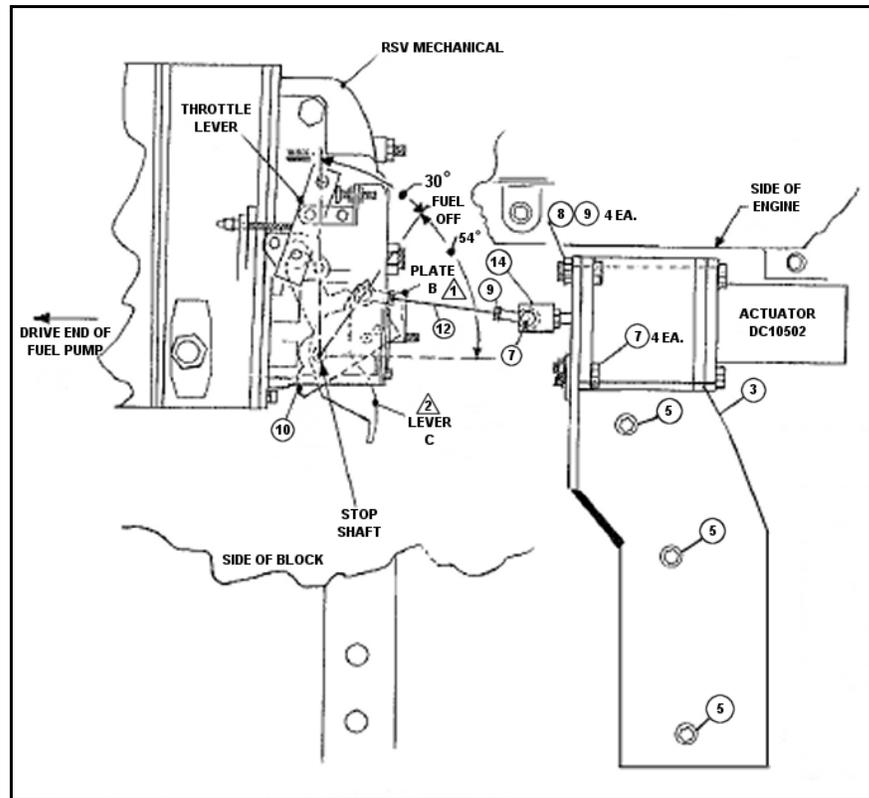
Below left side of engine, 30° below a horizontal reference line. Stop lever is between fuel pump and block.
